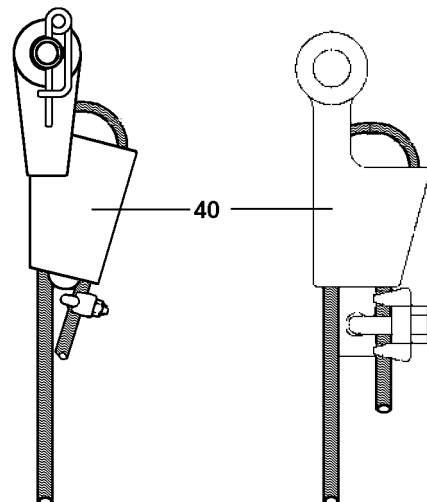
Rope end connection without locking clamp or locking cast sleeve
